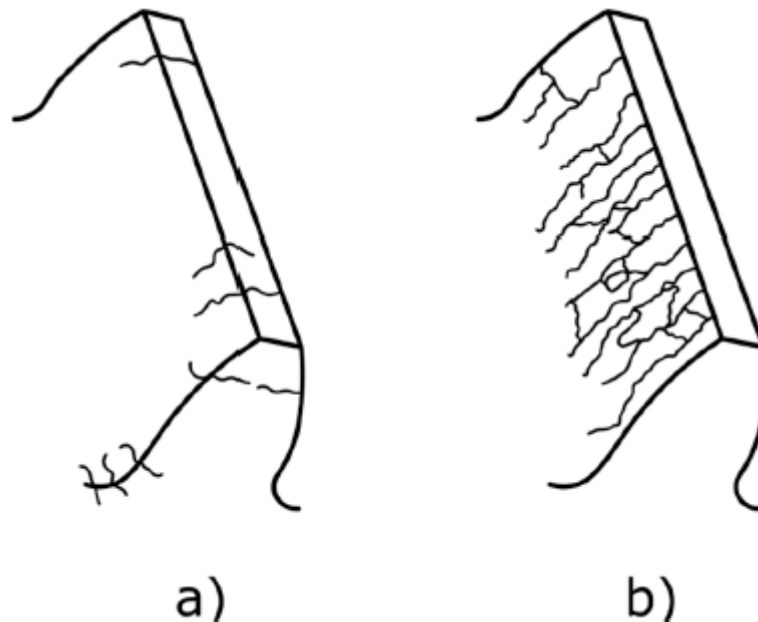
a) Cracks after hardening, b) cracks after grinding.
